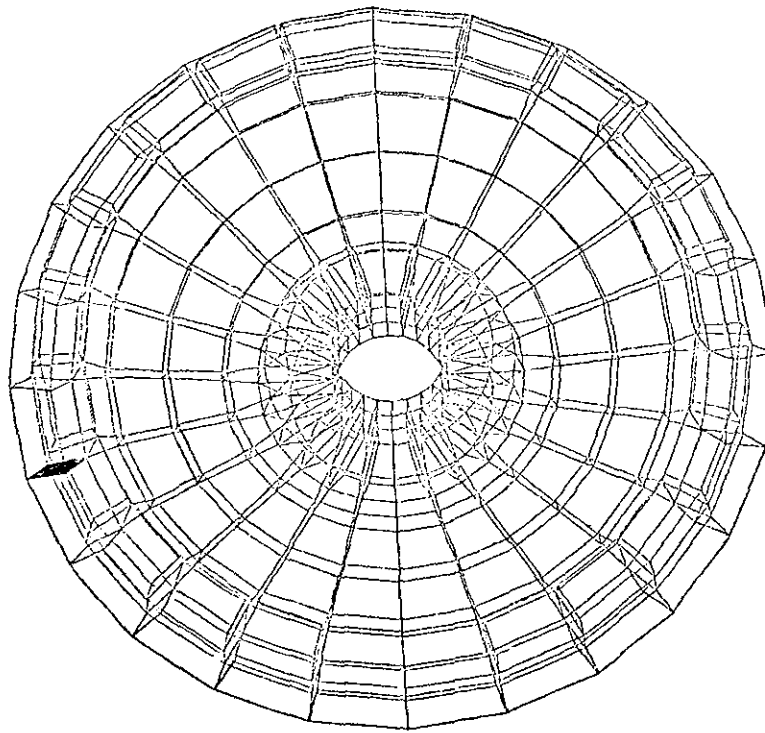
VIEW OF A 33 INCH WHEEL WITH ONE SMALL RADIAL FLANGE CRACK - ANSYS GEOMETRY
